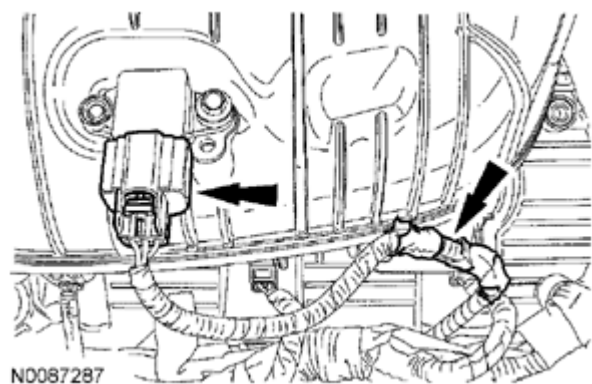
Locating Manifold Absolute Pressure Electrical Connector And Wiring Retainer
